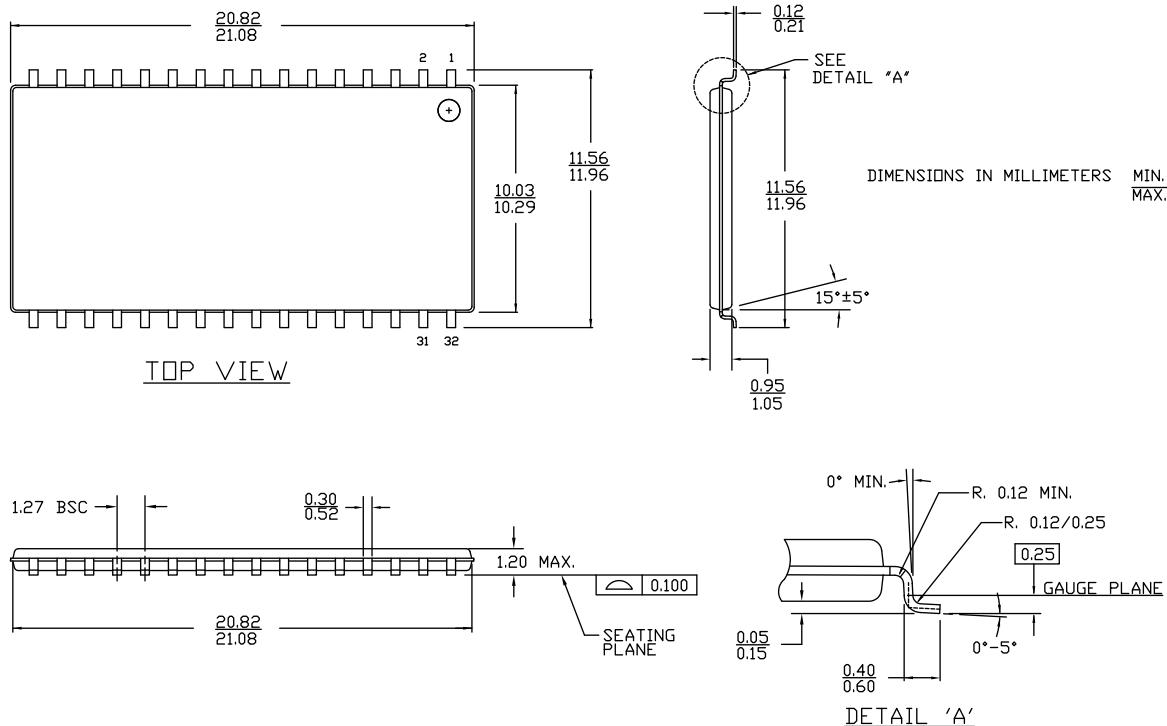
32-pin SOJ (400 Mils) V32.4 (Molded SOJ V33) Package Outline, 51-85033
